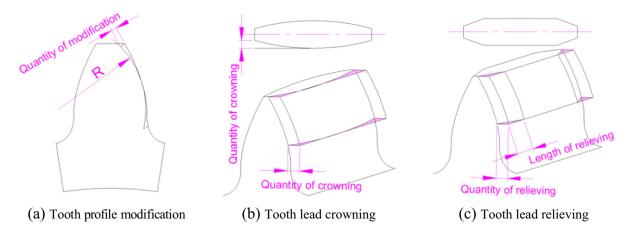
Image of tooth profile modification, tooth lead crowning and tooth lead relieving.
